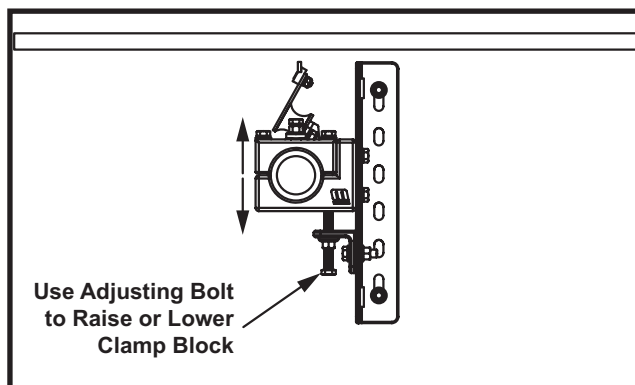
Martin® P2 Secondary Belt Cleaner HD Bolt Tensioner Adjusting Bolt
